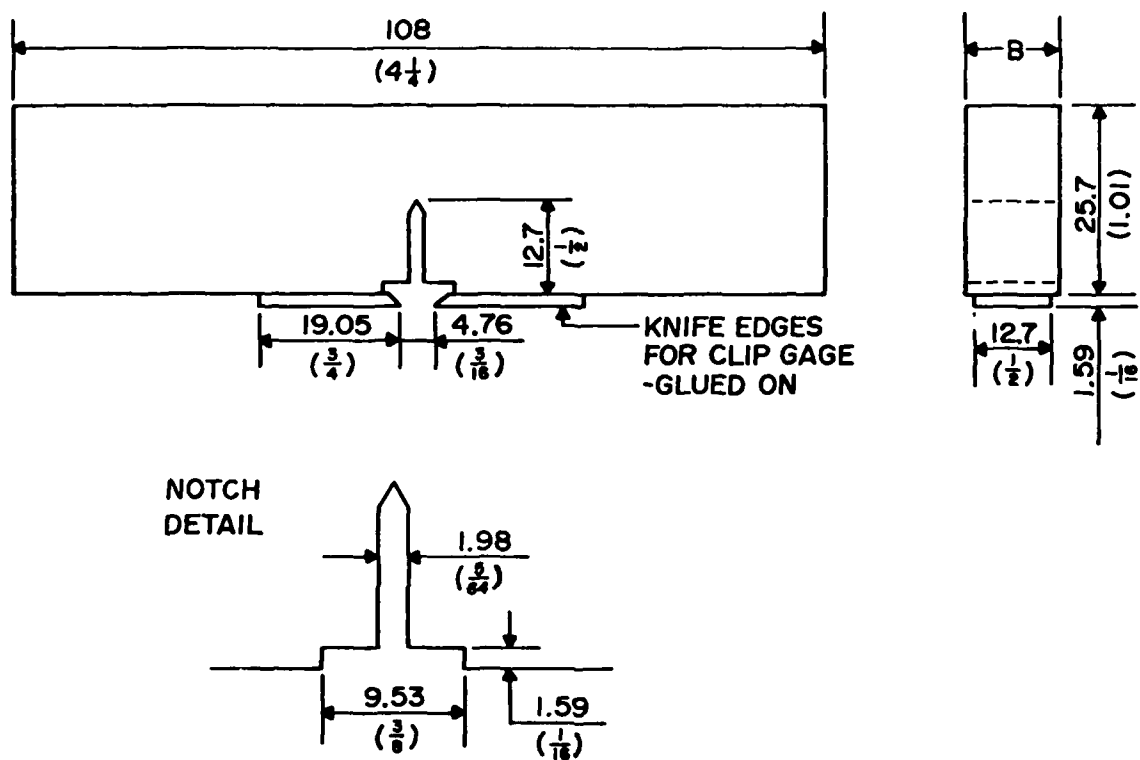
Three-Point-Bend Specimen [dimension in mm (in.)].
